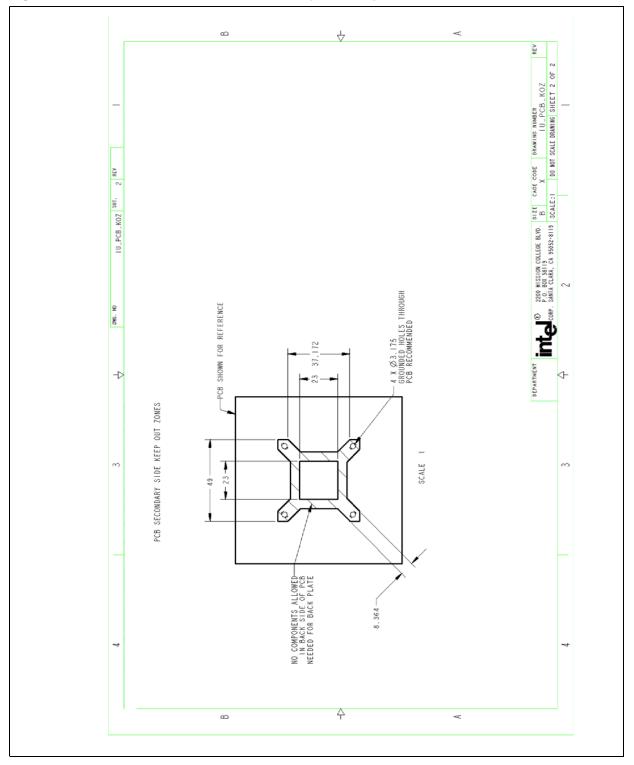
1U Reference Heatsink PCB Keep Out Requirements (Sheet 2 of 2)
